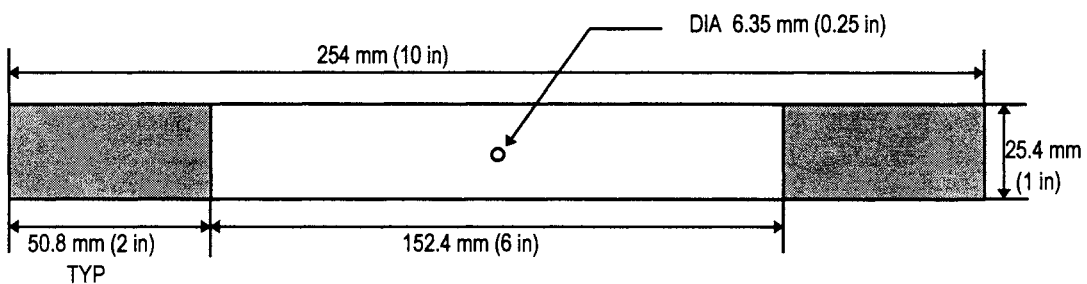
Dimensions of tensile and fatigue specimens. (Scale 1 mm = 1/2 mm)
